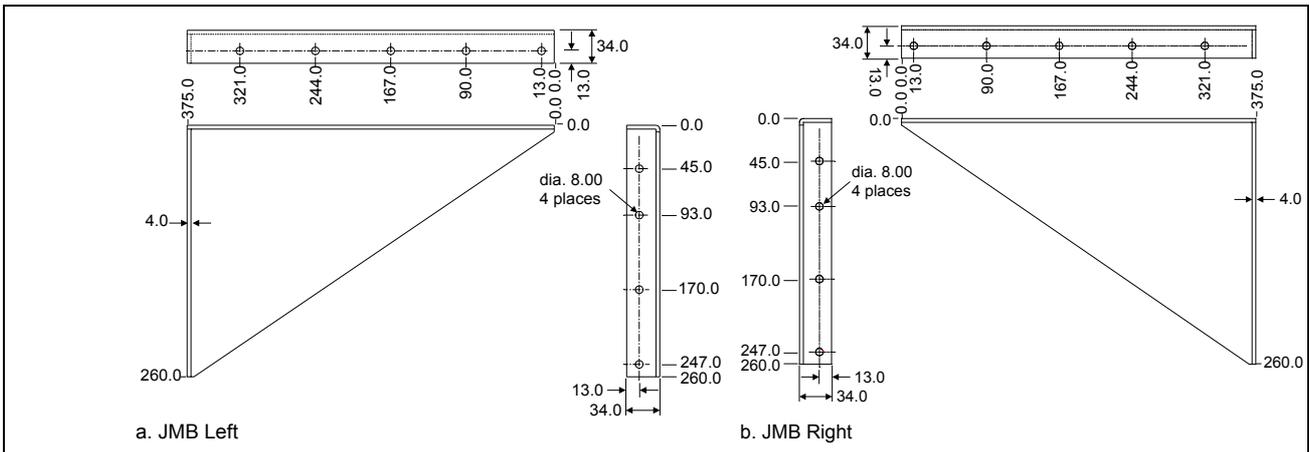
Drawing of Vertical Mounting Brackets (JMBs)
